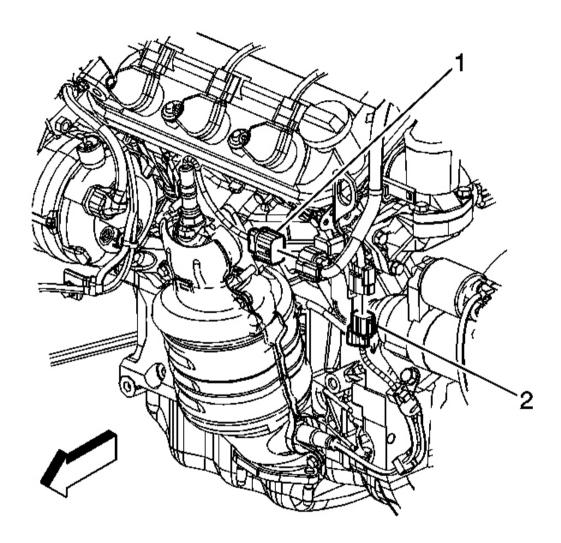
View of Heated Oxygen Sensor (HO2S) Bank 2 Sensor 2 Courtesy of GENERAL MOTORS CORP.
